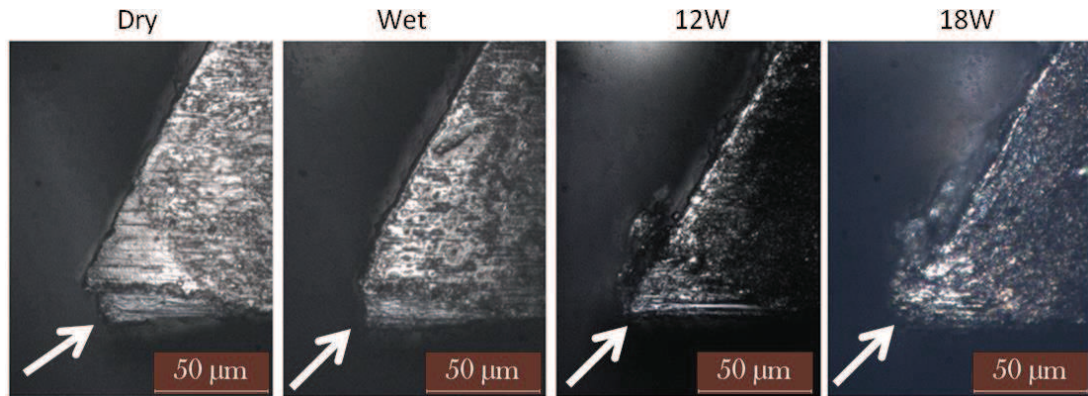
Flank wear for dry, wet, 12 W, 18 W cases; machining condition 1.
